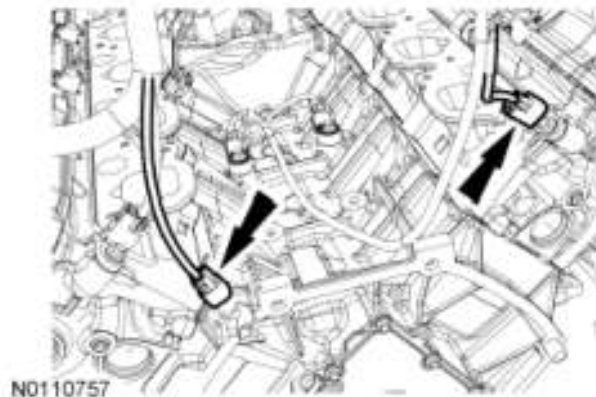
Locating LH And RH Camshaft Position (CMP) Sensor Electrical Connectors
